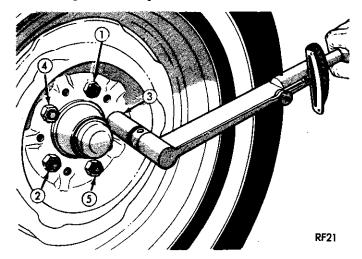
Wheel Nut Tightening Sequence STOP LAMP SWITCH ADJUSTMENT
